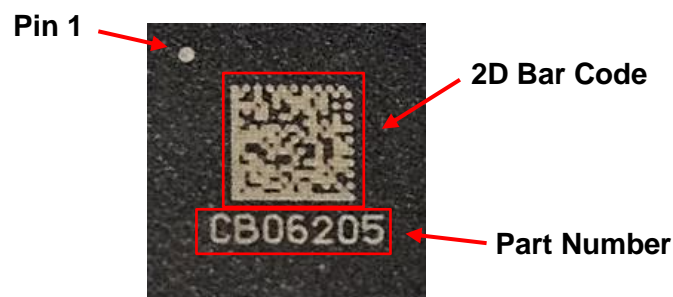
Typical marking with Pin 1 identifier, 2D barcode and Part Number
